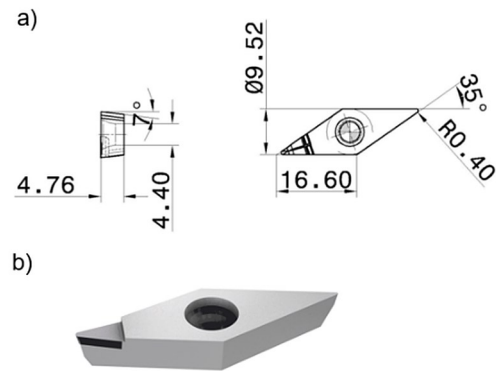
Cutting insert VCGT 160404: a) dimensions, b) photo
